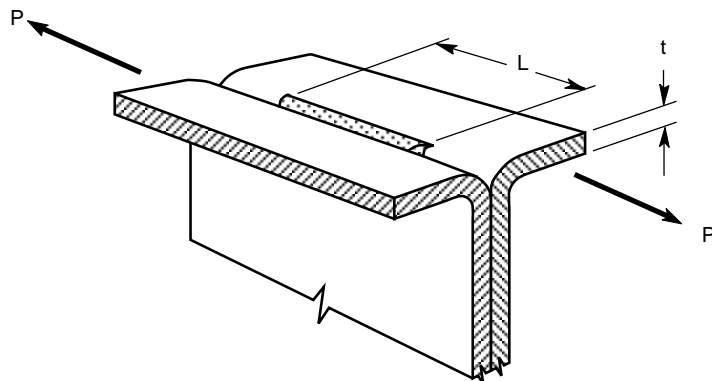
C Shear in Flare V-Groove Weld
